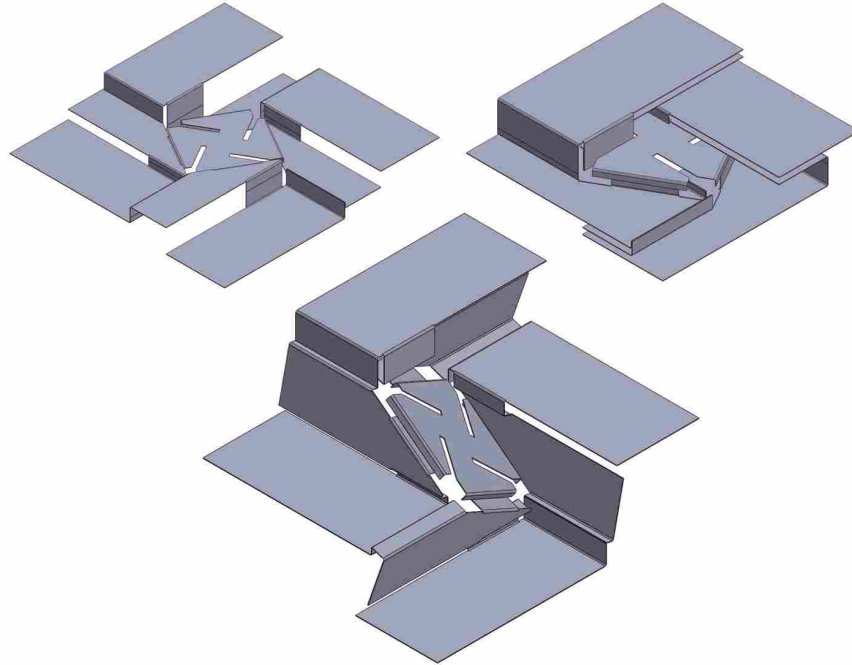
Sheet metal square-twist mechanism designed using the offset panel technique shown in flat, folded, and partially folded states.
